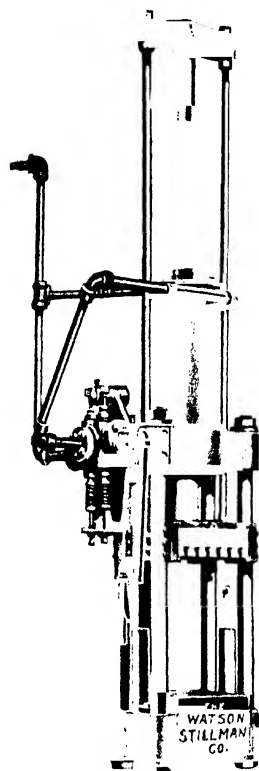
Cold Molding Press Equipped with Special Operating Valve.
